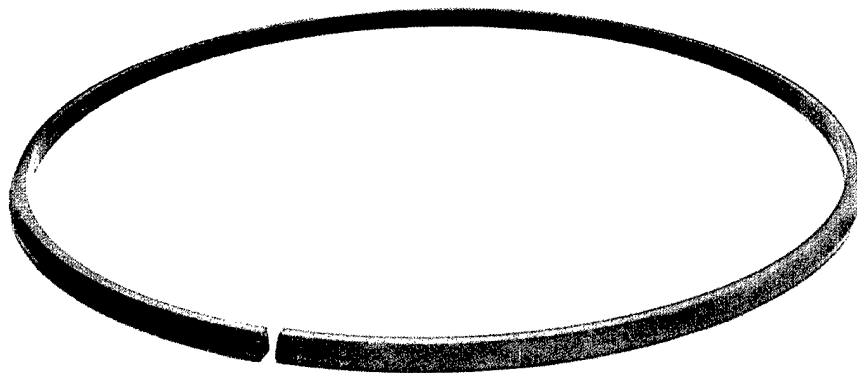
Photograph of Chamfered, Butt-Cut Piston Ring
